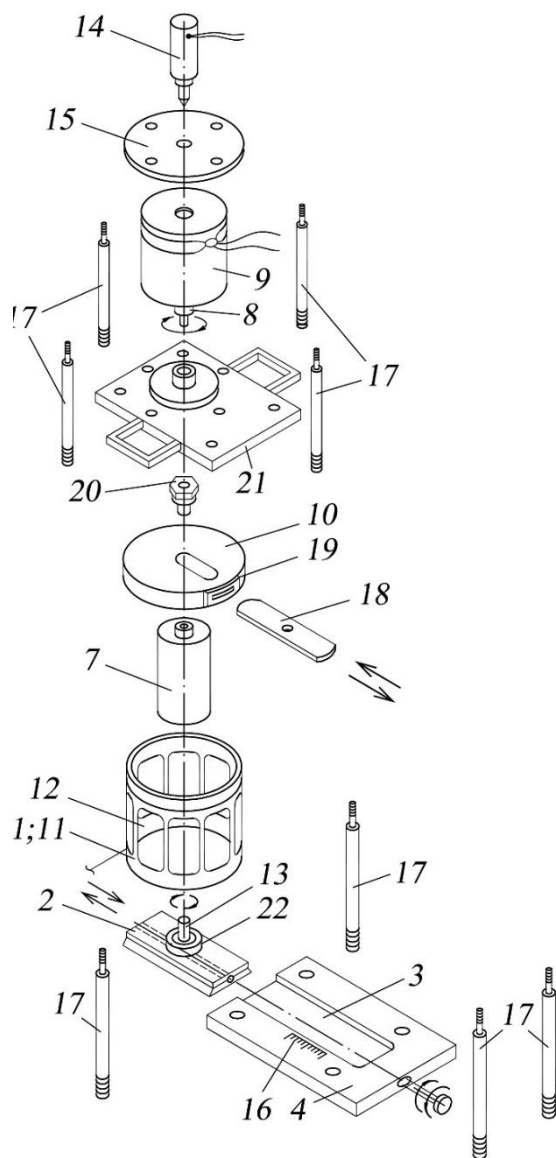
Scheme of the experimental stand: 1 – stator; 2 – plate; 3 – groove; 4 – base plate; 5 – threaded screw; 6 – handle; 7 – rotor; 8 – shaft; 9 – electric motor; 10 – cover; 11 – metal frame; 12 – transparent cylinder; 13 – axis; 14 – tachometer; 15, 21 – plates; 16 – scale; 17 racks; 18 – sealing plate; 19 – seals; 20 – intermediate sleeve; 22 – clips [309]
